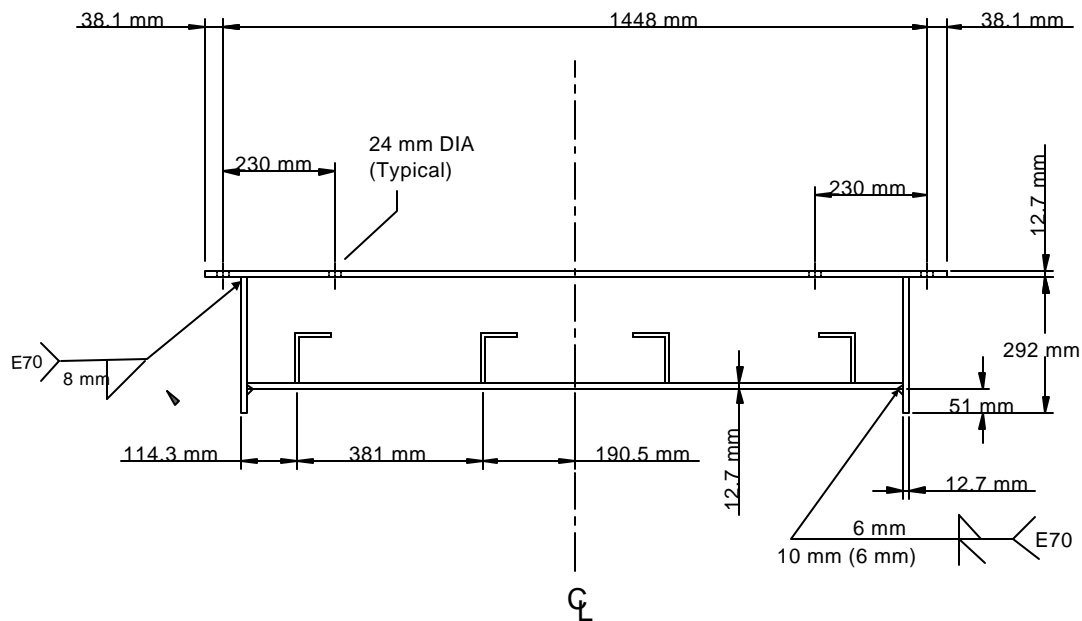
Typical stiffened panel specimen employed in experiments.
